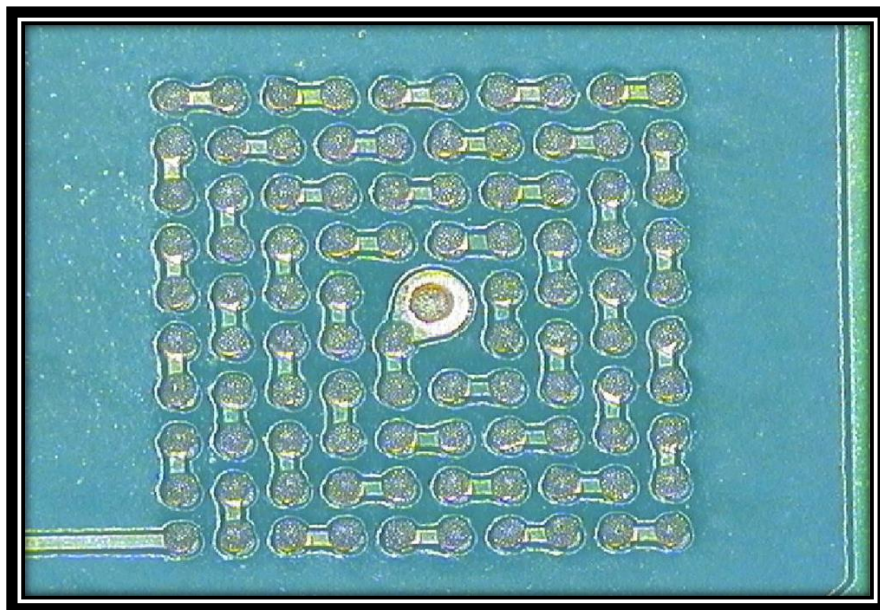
Misaligned Solder Paste Print prior to X-Y Realignment
